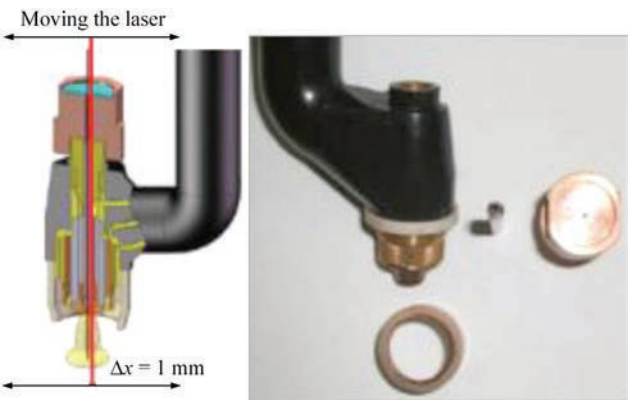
Head for laser-plasma microwelding and cutting of thin metals (radiation power of 100 W, welding current of 40 A) [24]
